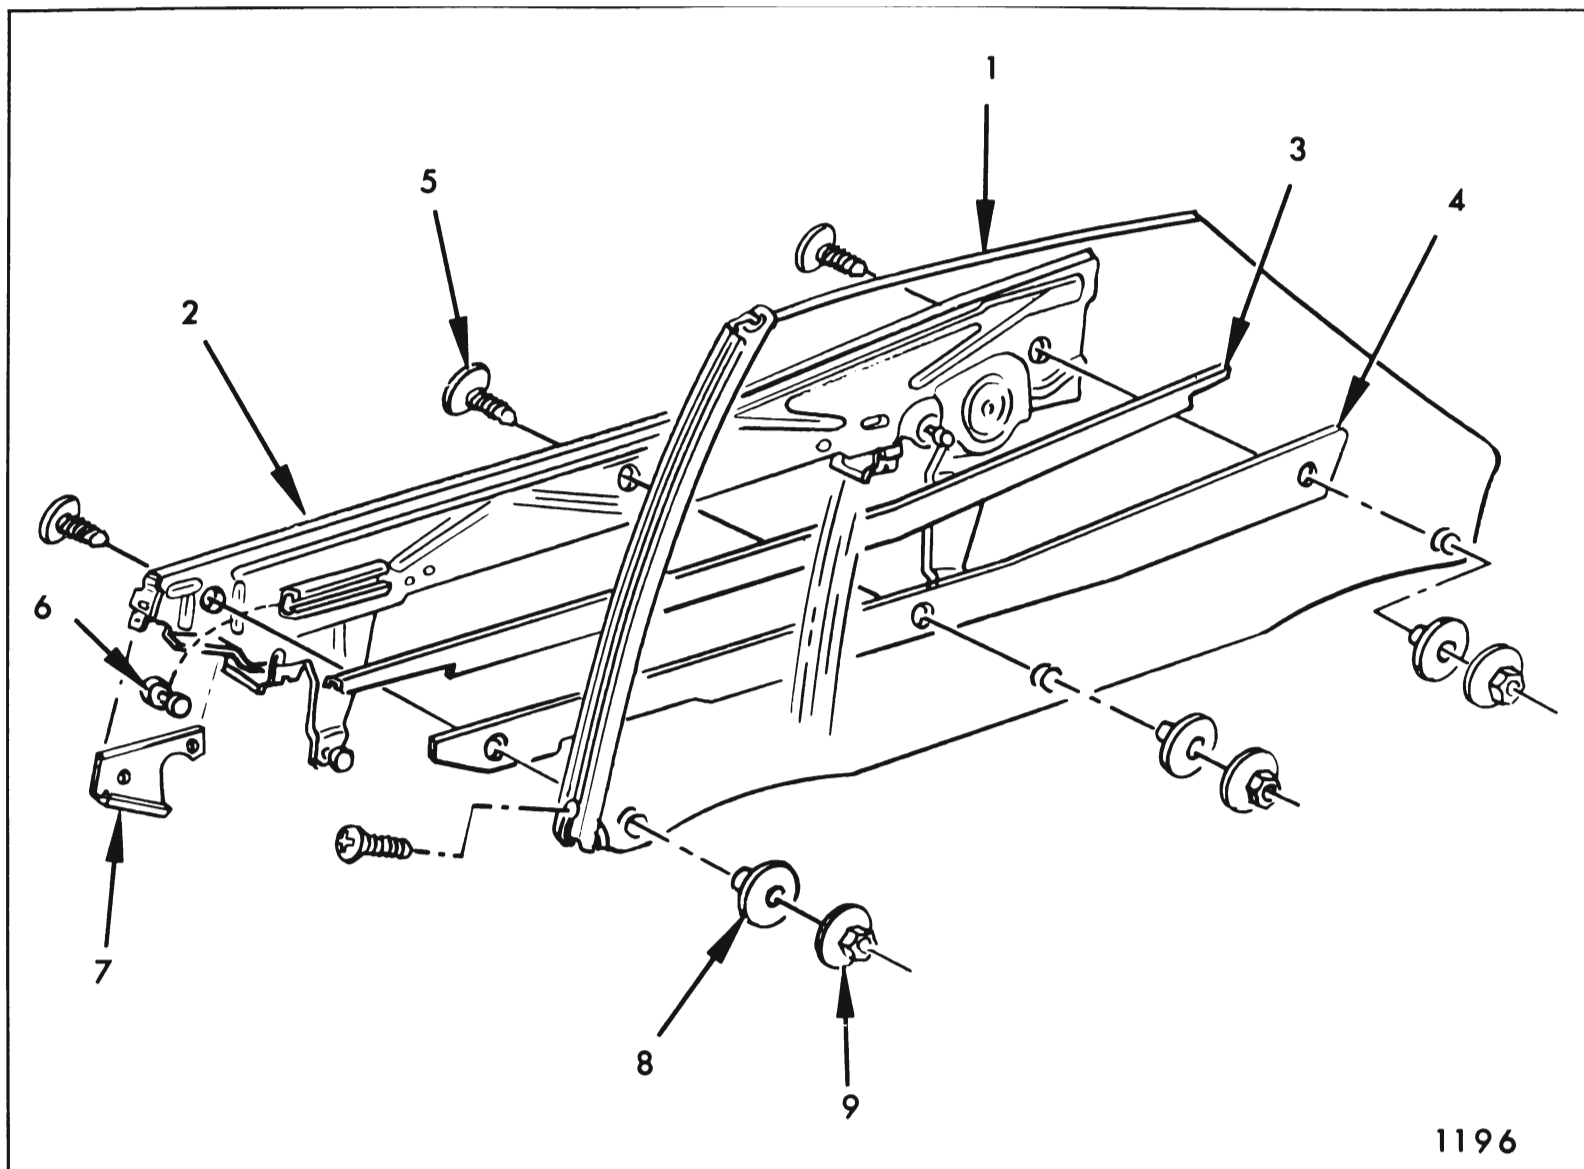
Rear Door Window Assembly - "B & C-39" Styles Shown - "A" Similar
